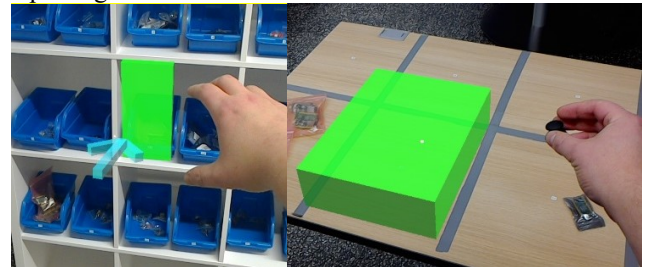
The Augmented Reality picking instructing telling the participant to pick a part from a bin using green rectangles (left) and to place the previously picked part (right).
